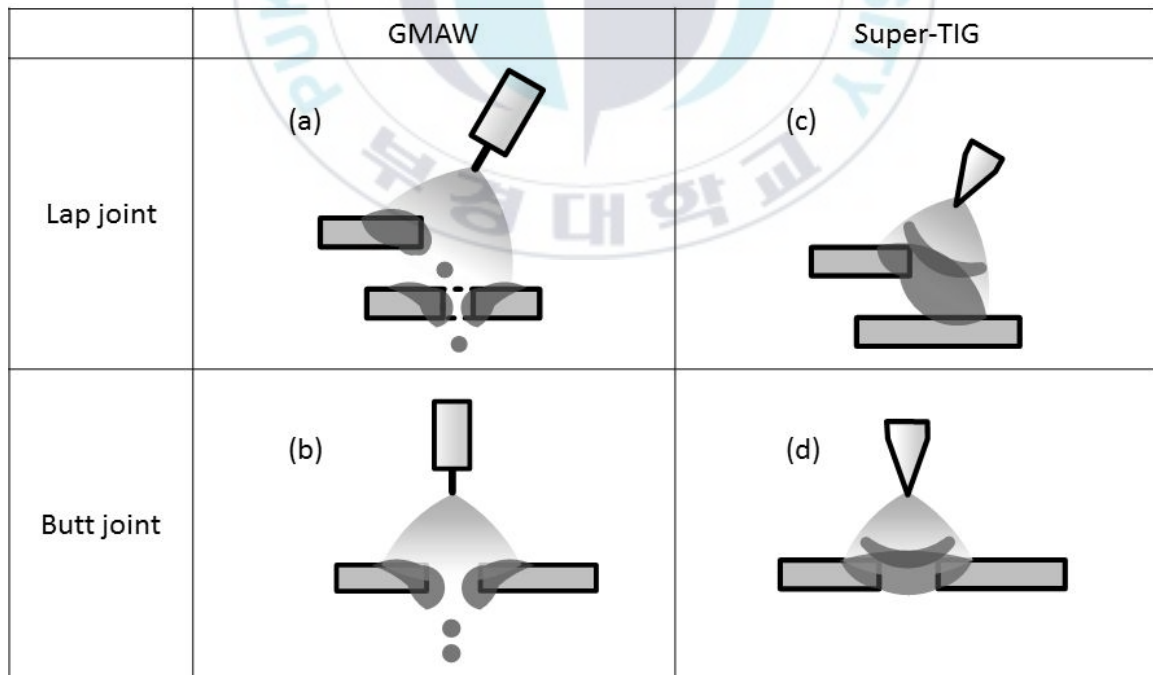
Prevention of burn through by Super-TIG in sheet welding
